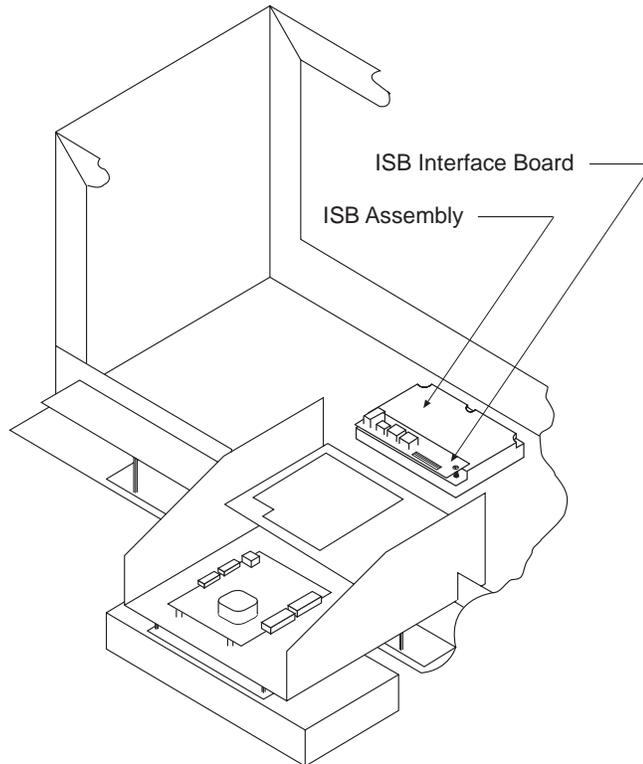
REPLACING THE INTRINSIC SAFE BARRIER ASSEMBLY. *Placing both DEMs in the service position allows for easy access to the Intrinsic Safe Barrier Assembly.
